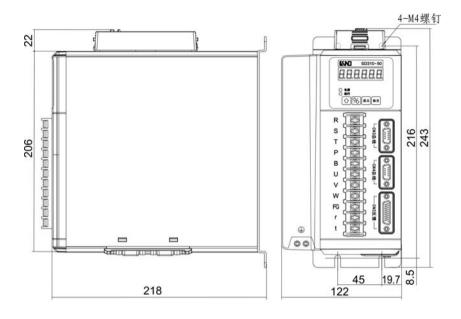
KND SD310/ 311 - 50 installation dimension (unit: mm)
